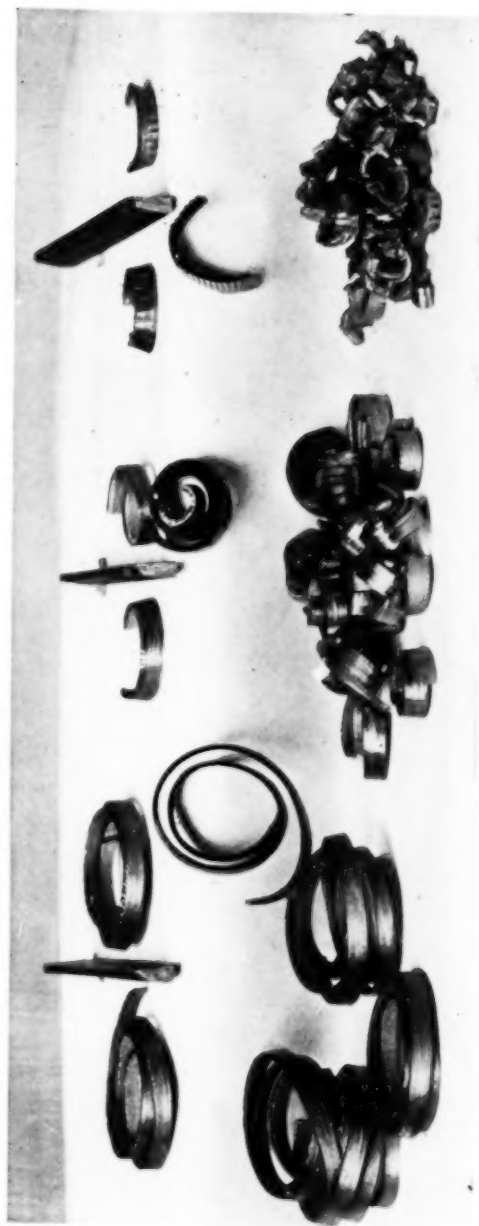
SAMPLES OF CHIPS AND CUTTERS: CUTTING ANGLES FROM LEFT TO RIGHT 45 DEG., 60 DEG. AND 75 DEG. THESE CHIPS WERE PRODUCED IN AN ENGINE LATHE WITH HOLDER SHOWN IN FIG. 12
